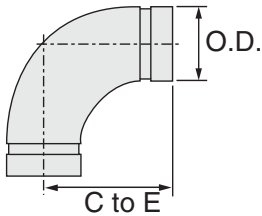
SS 90° STAINLESS STEEL ELBOW
